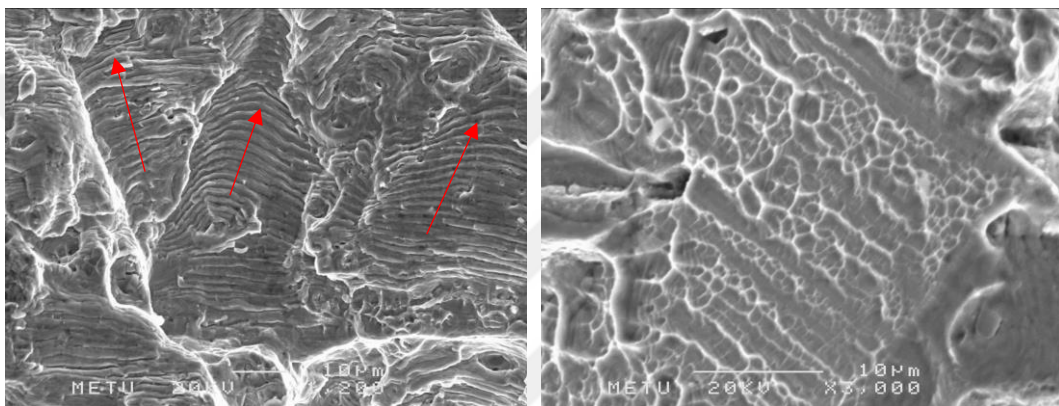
Fatigue crack growth (left) and fast fracture region (right) of 300
